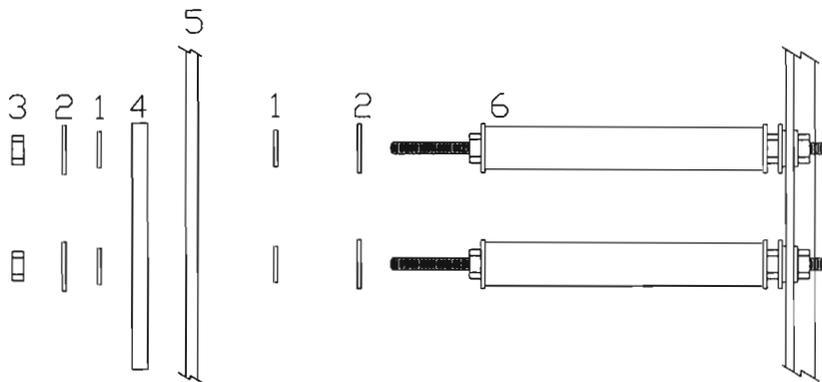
Sump Spacer Bolt Arrangement
